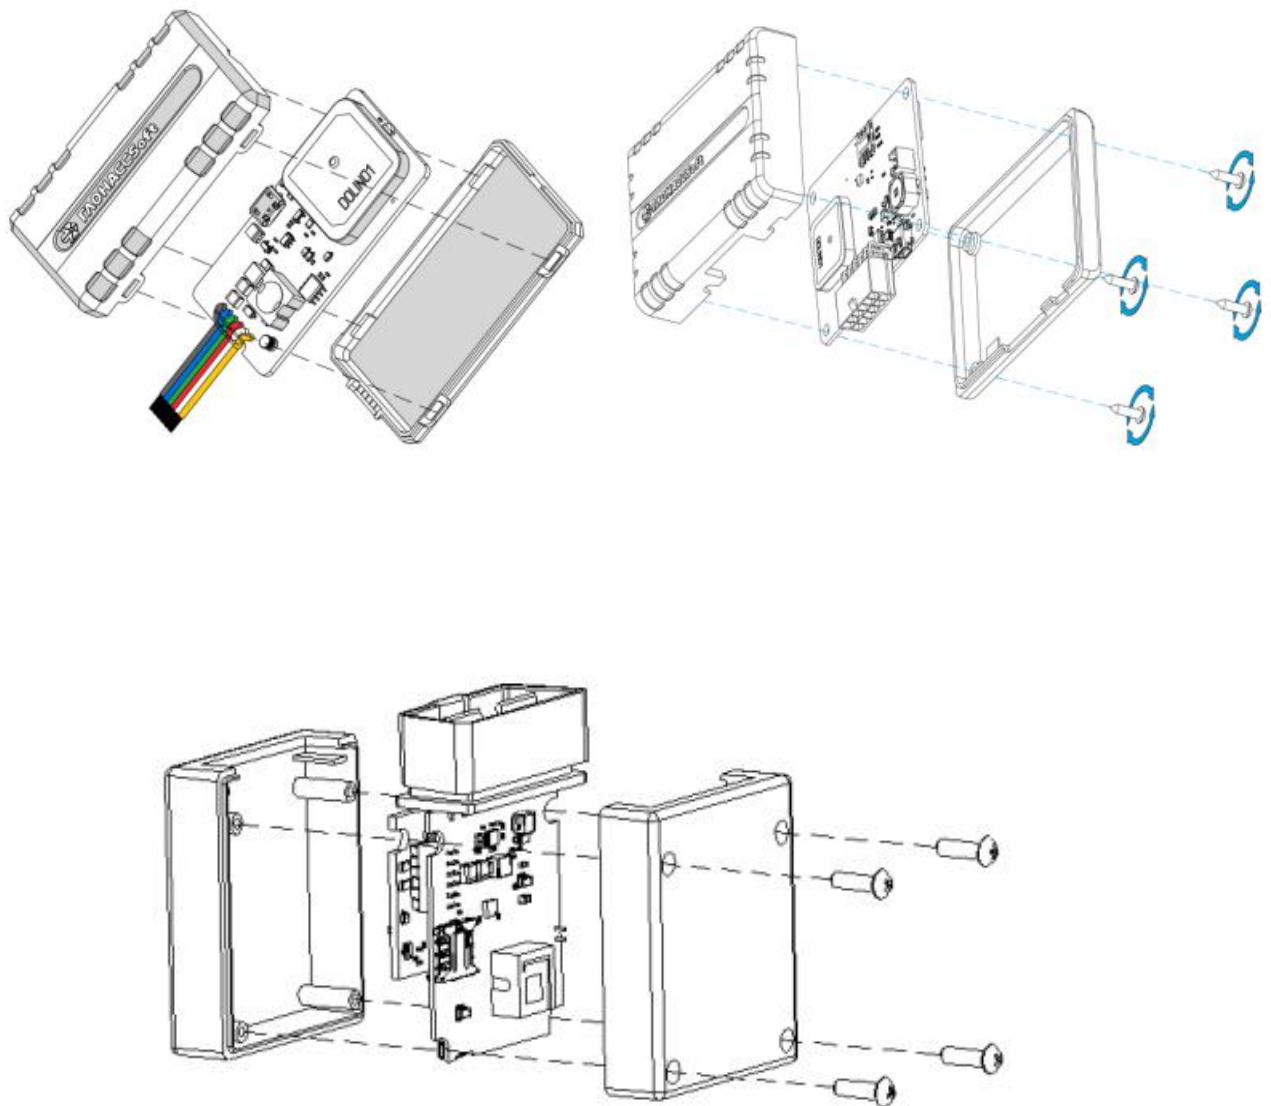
Opening tracker casing (310 - on the left, 312 - on the right, 311 - below)
